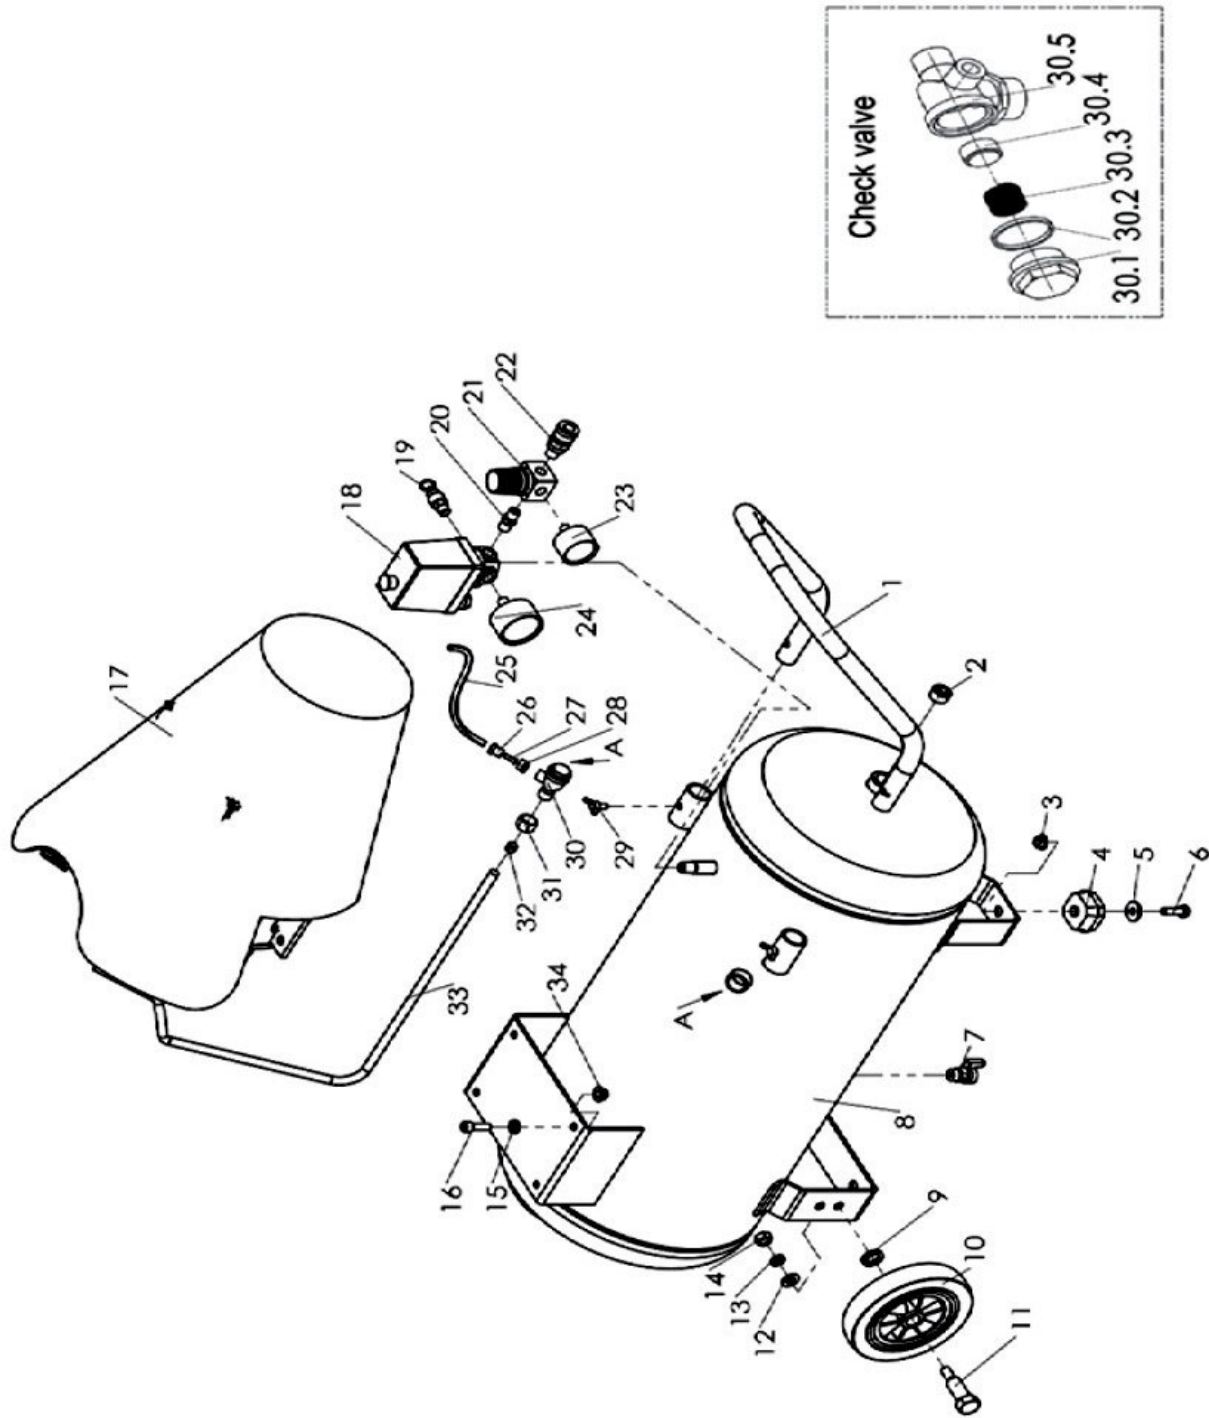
Spare parts drawing 1 MOBILBOY 421/50 AC
